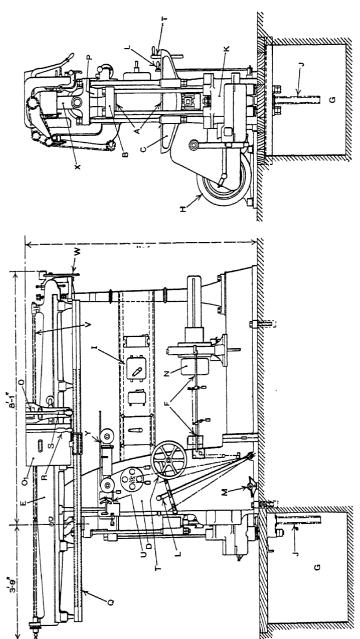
Denison 15-ton Vertical Single-lever Testing Machine (Machinery)
